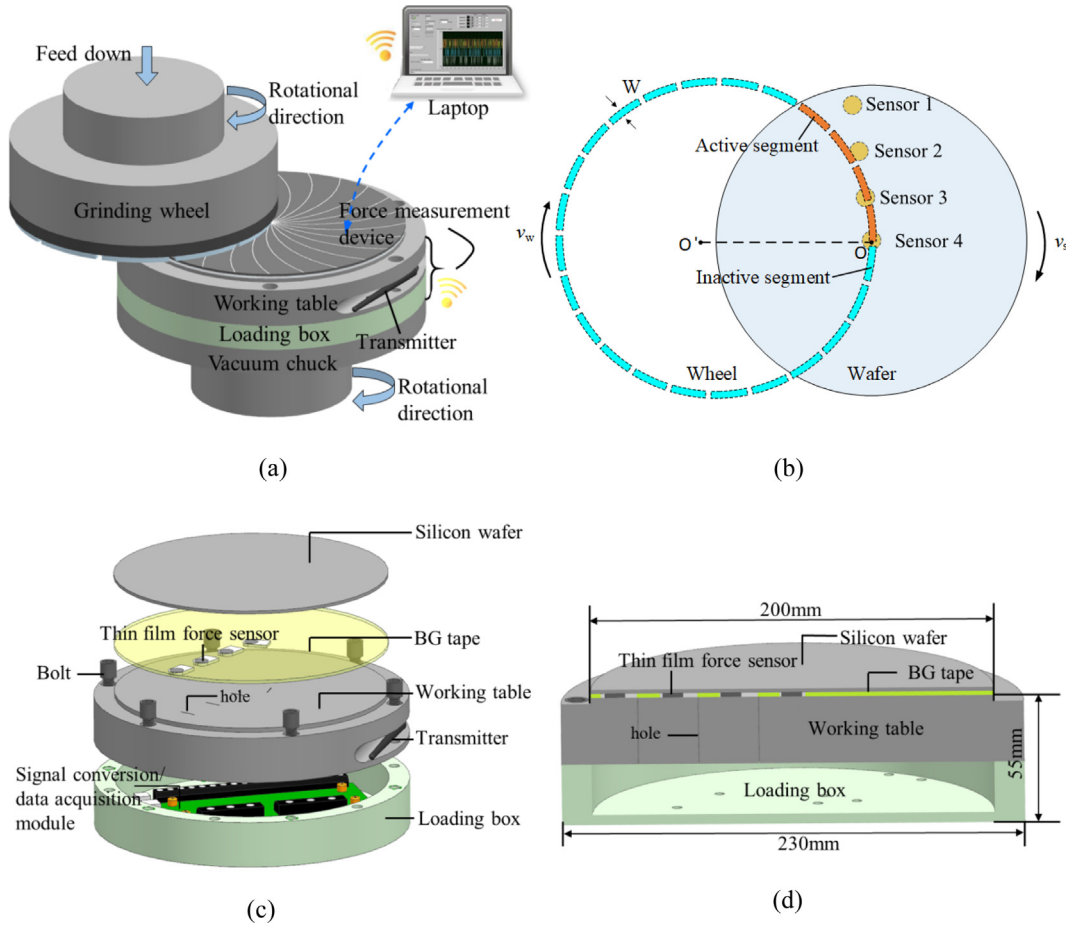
Schematic diagram of the grinding force measurement system. (a) Grinding force measurement system; (b) Top view of the rotating wafer and grinding wheel; (c) Force measurement unit; (d) Cross-section of the force measurement unit.
